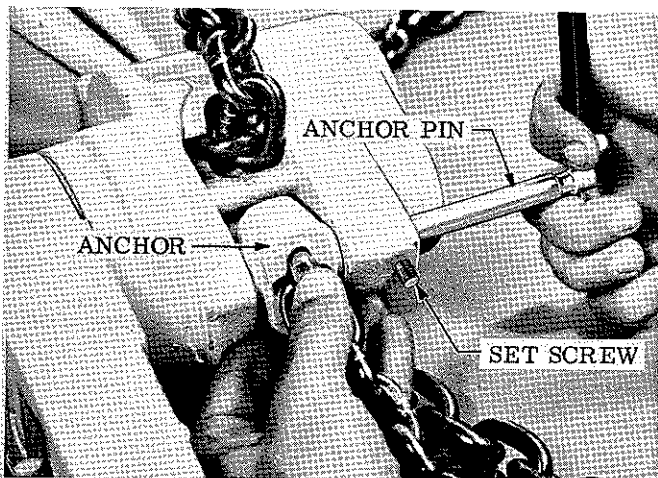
Removing Load Chain Anchor Pin using Tool for Pulling
